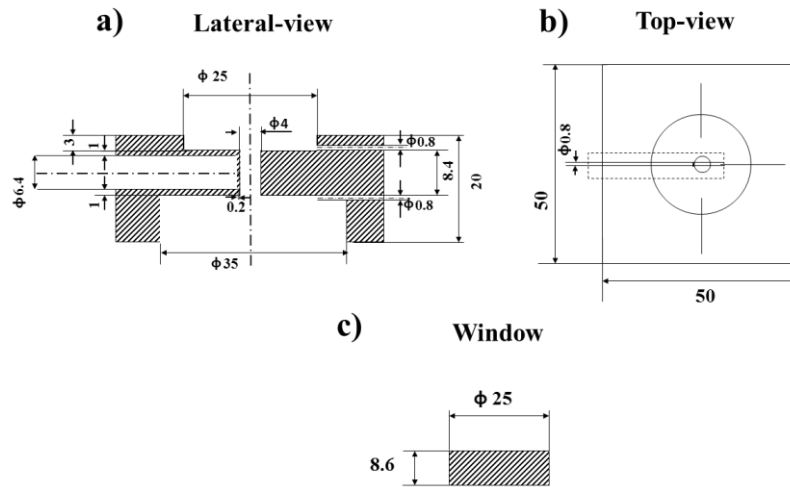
PA cell design with the selected dimensions and without the screws, (a) lateral-view, (b) top-view and (c) lateral view of the window. Dimensions are in mm.
